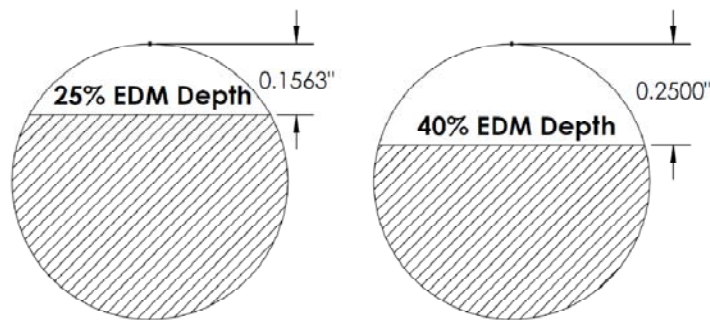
Two shaft cross-sections, wire EDM cut depths.
